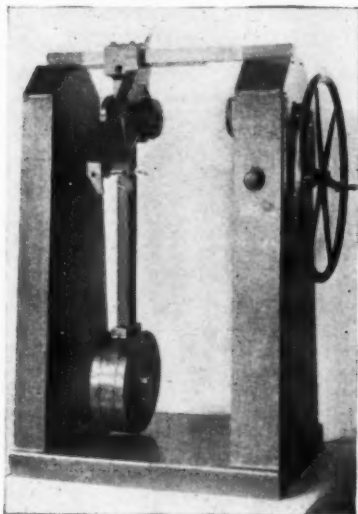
The new torsion testing machine — a striking example of design improvement through welding.
